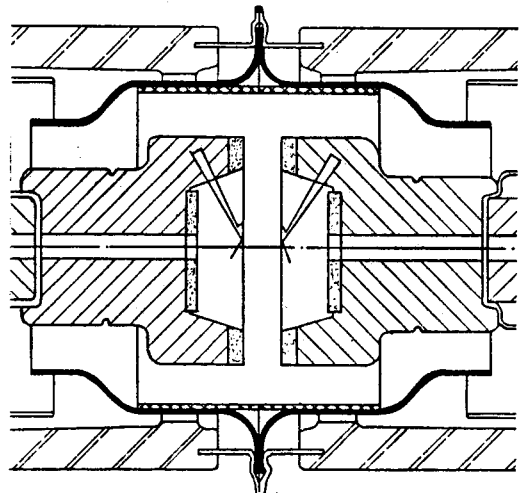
Improved 'V8' assembly 20 kA (rms). Note extra 'CLR' disc in cup of contact and extra centre shield.
